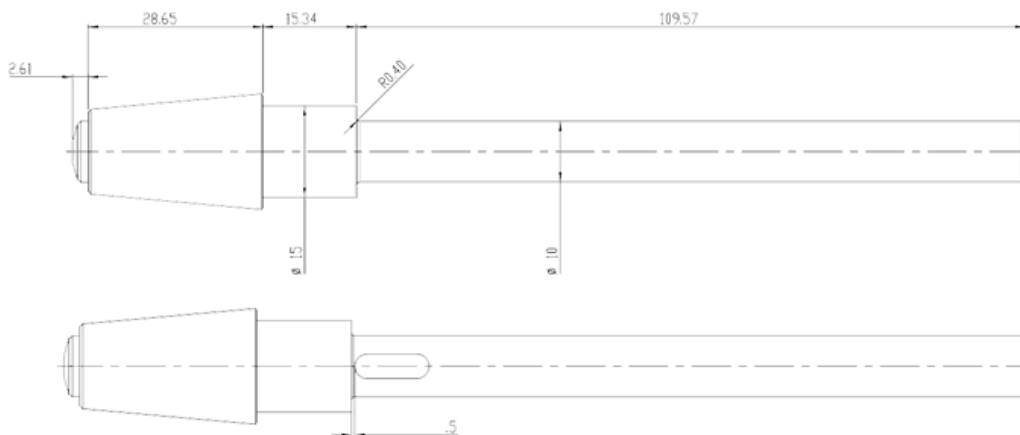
The geometry and the dimensions (in mm) of the specimens.
